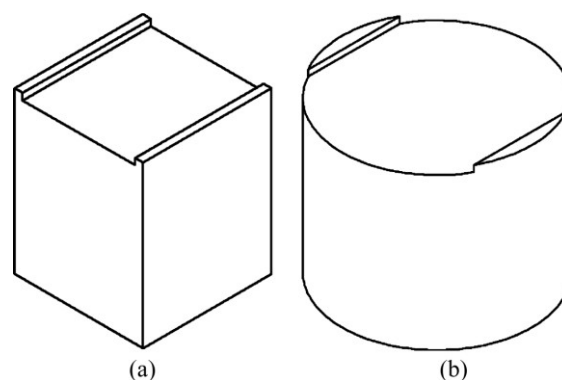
Schematic illustration of brazing cubic (a) and cylindrical (b) specimens
